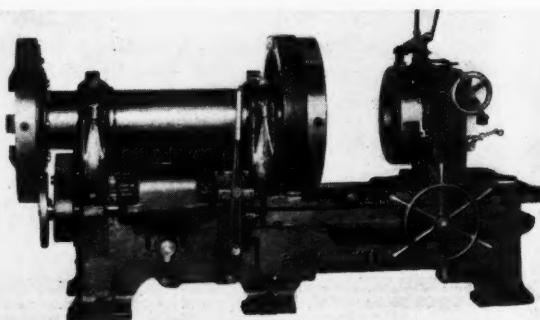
Rockford Three-Way Machine For Boring Tractor Crankcase
